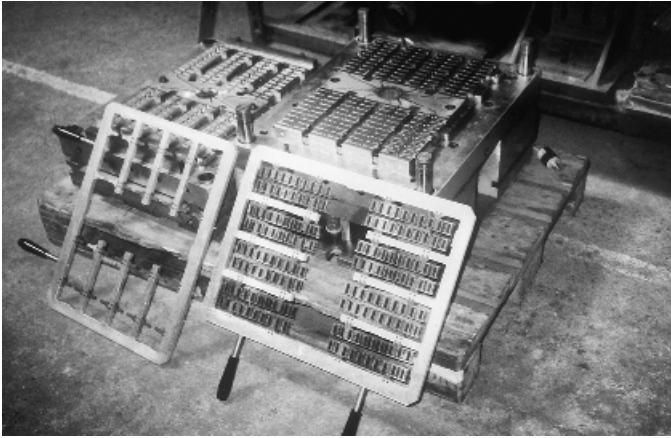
Production transfer mold, with work loading fixtures, for encapsulating 160 dual in-line integrated circuits per cycle, producing about 40,000 devices per shift with one press and operator.
